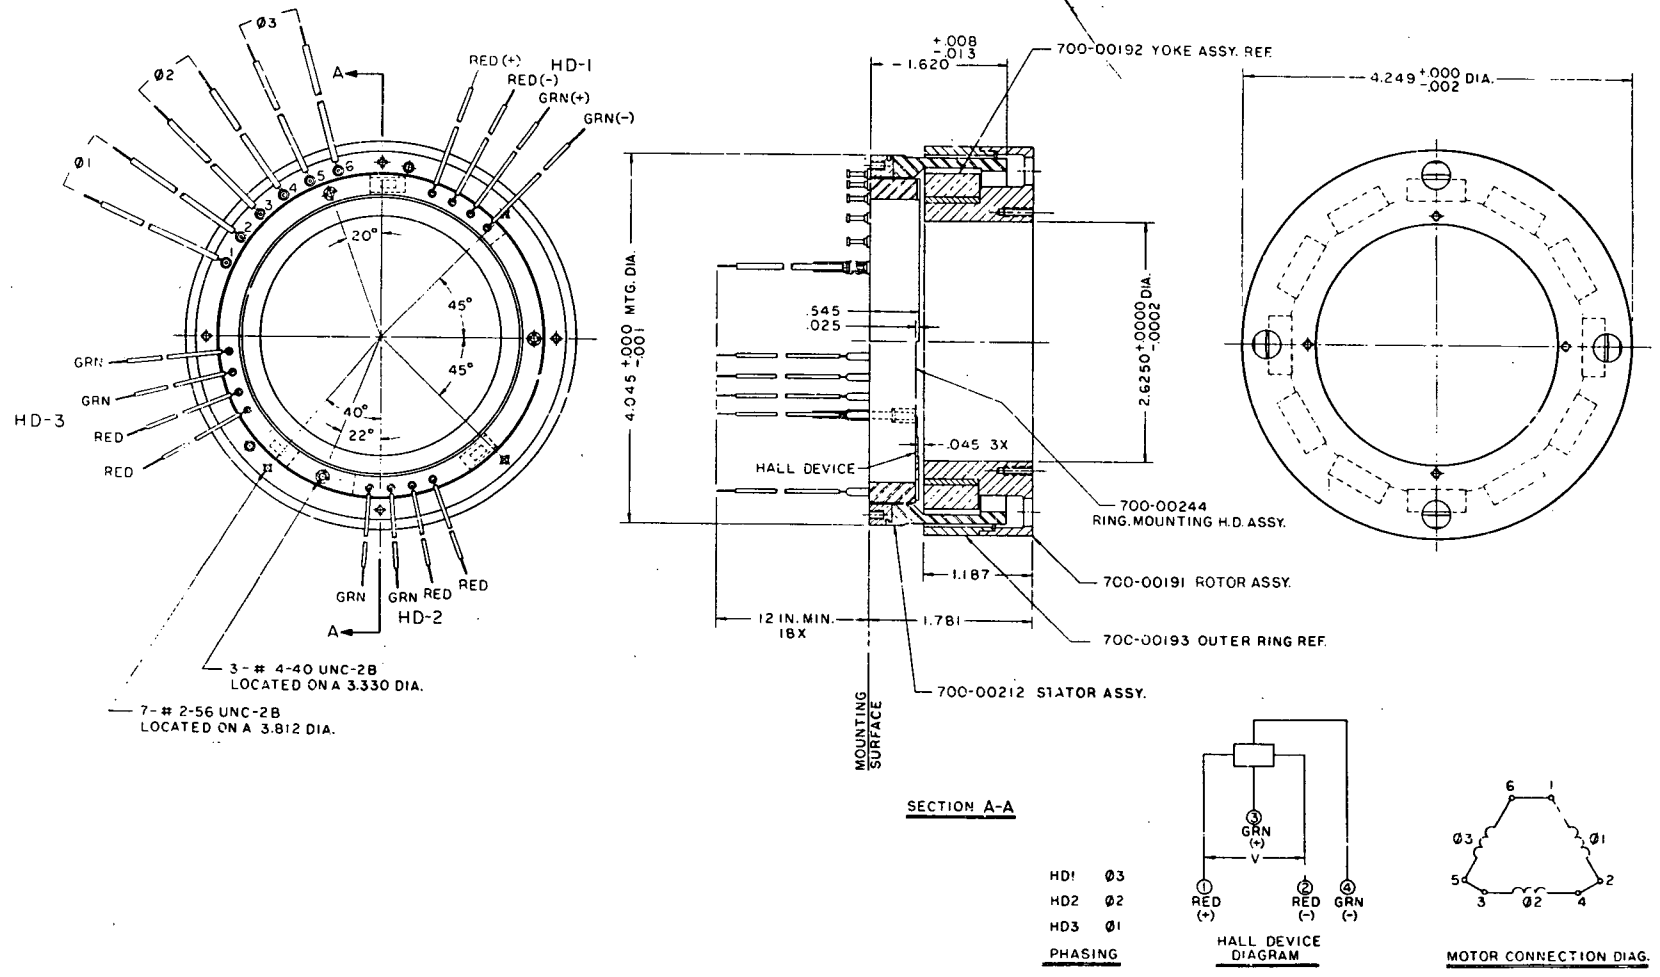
Ironless Armature Torque Motor, Outline Drawing
